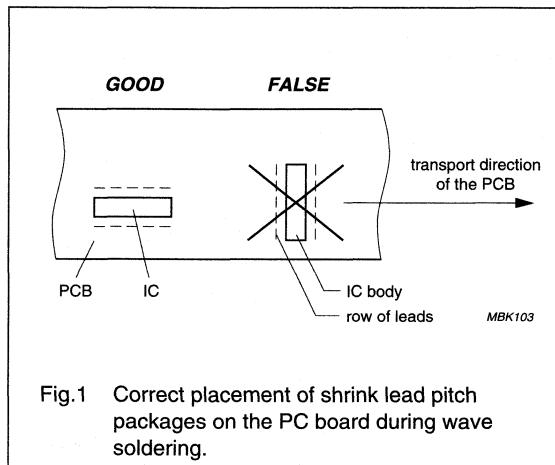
Correct placement of shrink lead pitch packages on the PC board during wave soldering.
